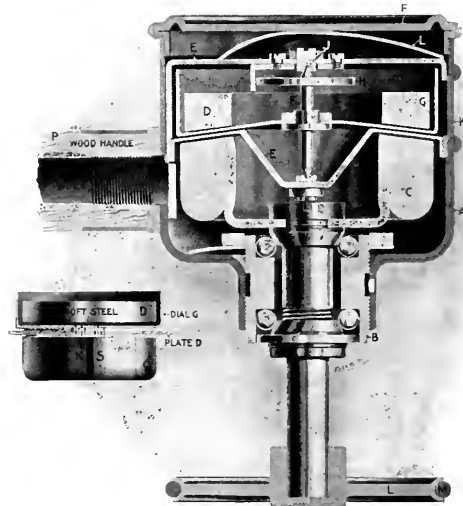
SECTIONAL VIEW OF CUT-METER.
